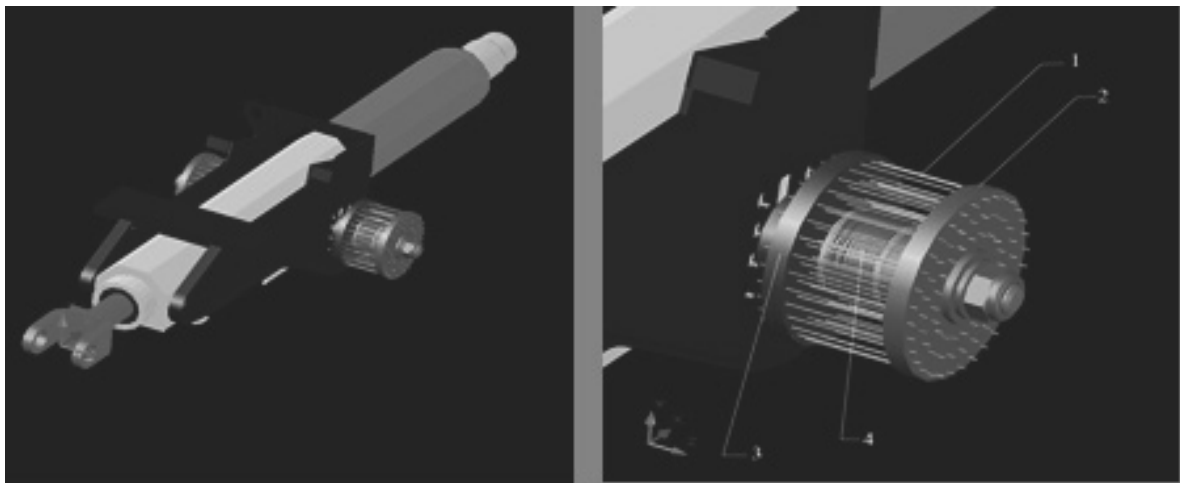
Drum prototype: 1-shape memory wires, 2, 3-drum plates, 4-disc springs
